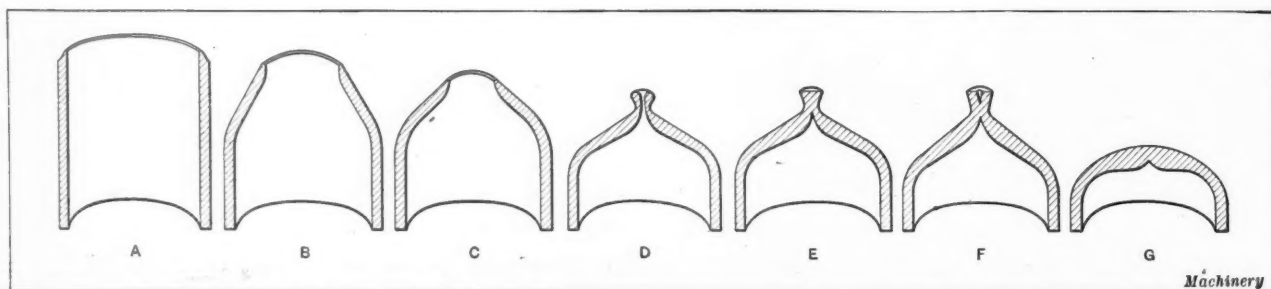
Successive Stages in Spinning Operation for closing the End of a Seamless Cylinder
